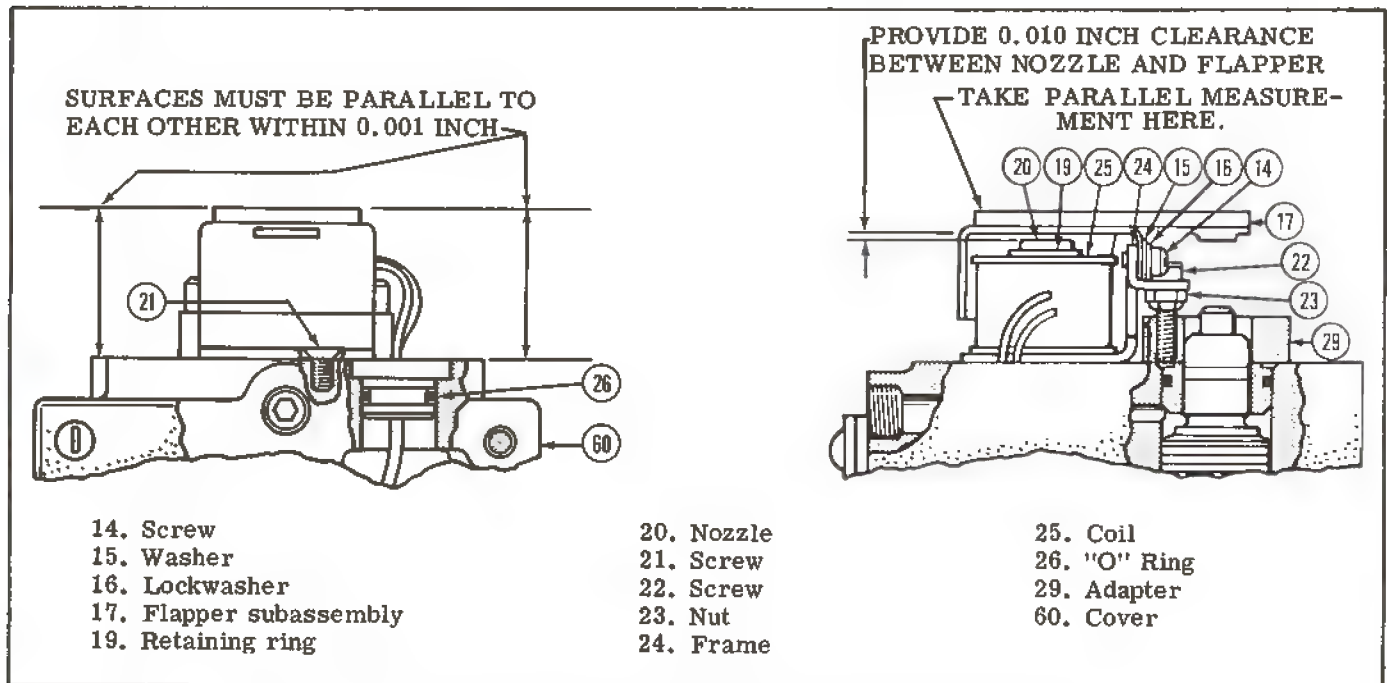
PRELIMINARY FLAPPER TO NOZZLE ADJUSTMENT
